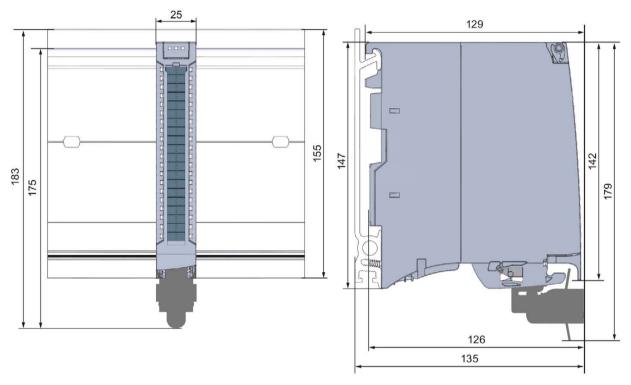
Dimension drawing of the AI 4xU/I/RTD/TC ST module
